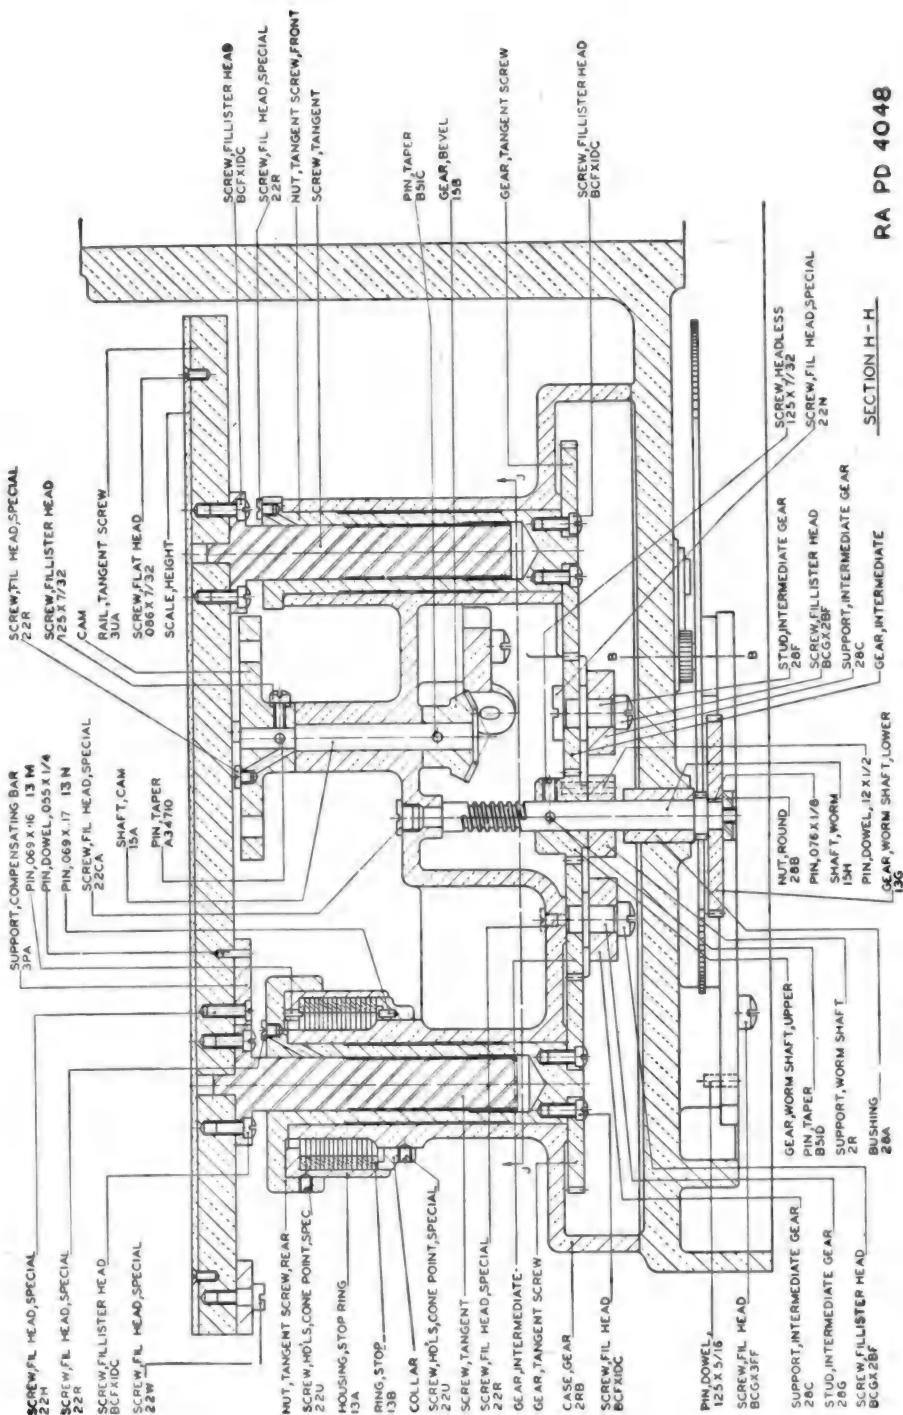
Mount, depression position finder, M1907—sectioned views.
